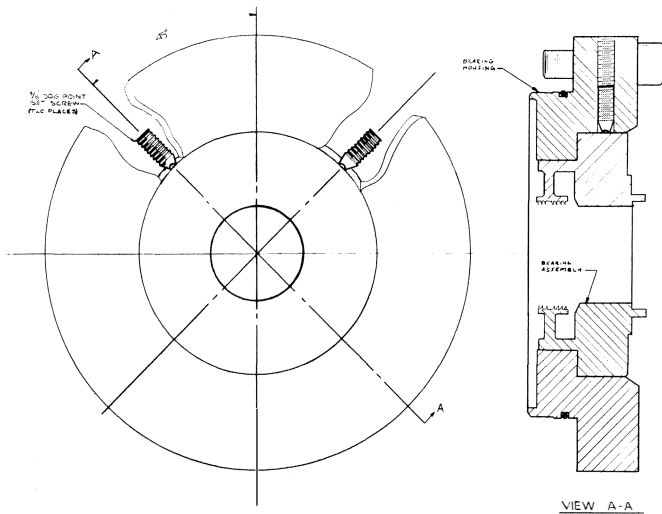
Coupling-end Bearing Modified With Set Screws to Secure Retainer in Bore.
